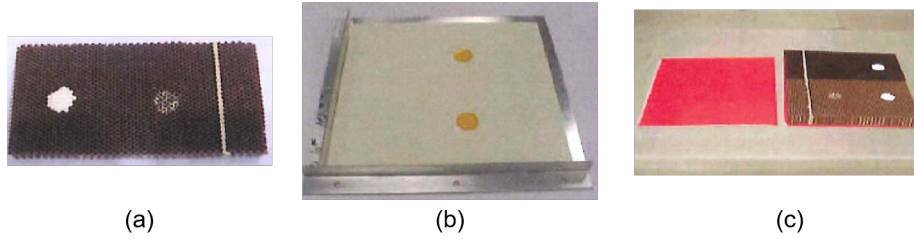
Honeycomb Sample with engineered defects (a) Honeycomb core showing potted core, machined core and core splice areas (b) Composite ply being laid up with pillow insert delamination flaws (c) Adhesive layer placed on flawed laminate with both cores in place on lower laminate skin
